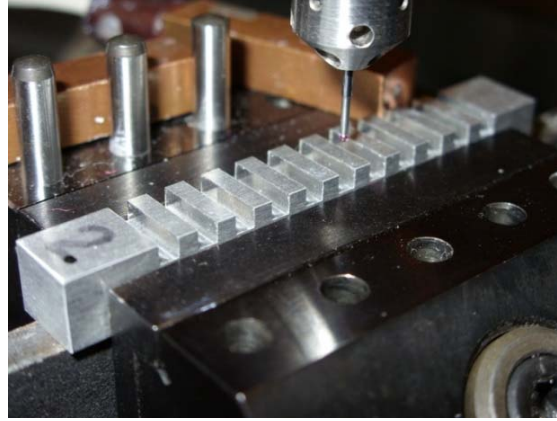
Measurement setup used for the calibration of the step gauges. The aluminium step gauge is shown in the figure
